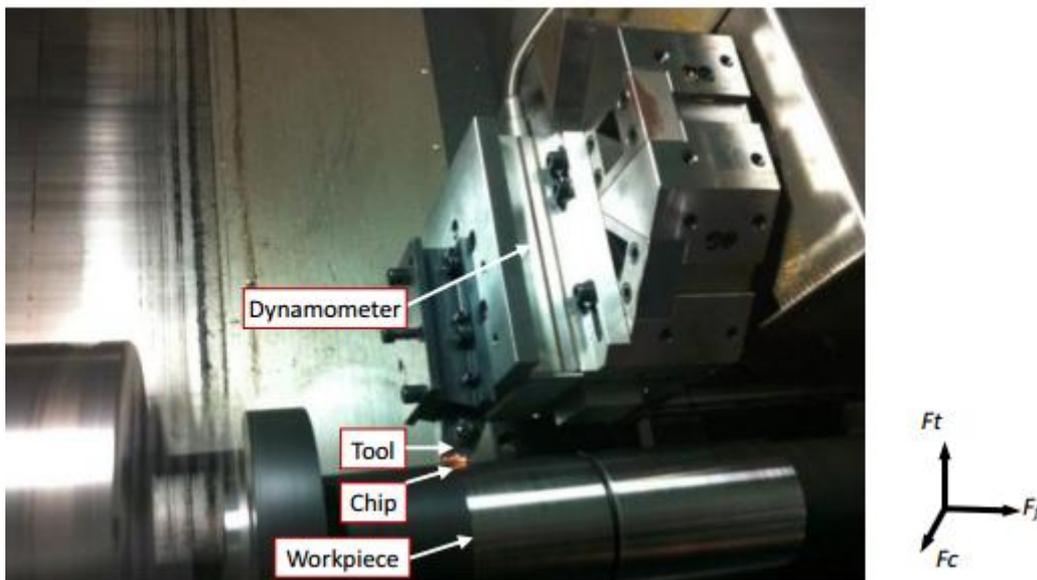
Experimental setups of hard machining with cutting forces measurement system [15].
